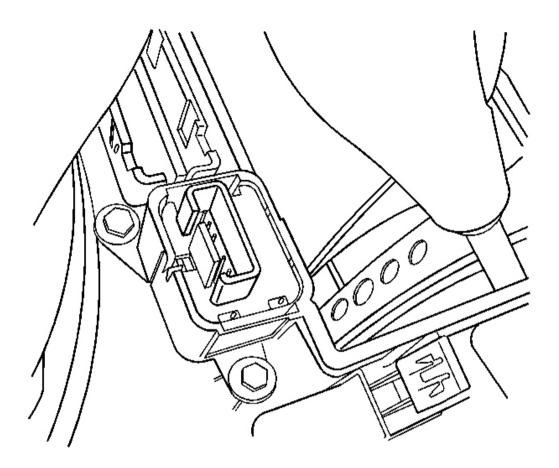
View Of Front Fog Lamp Switch Courtesy of GENERAL MOTORS CORP.
